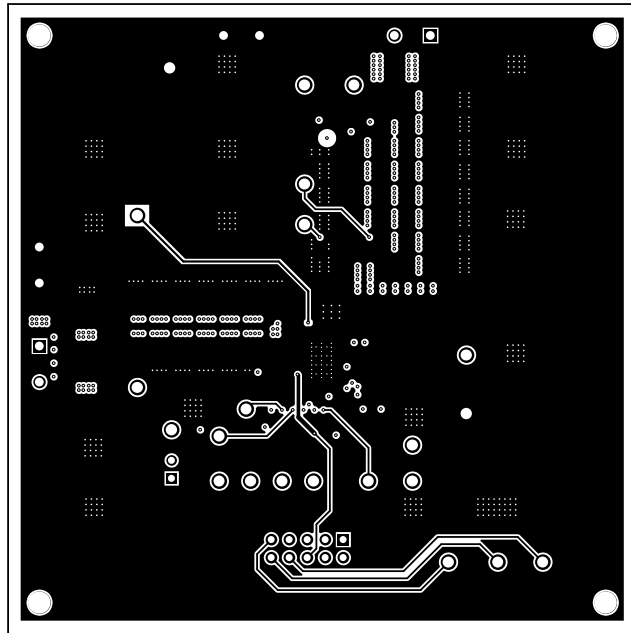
PWR-784EVM Inner Layer 3 (top view)
